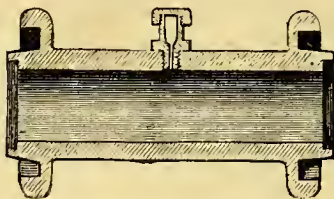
SECTION OF SMALL WHEEL HUB.
